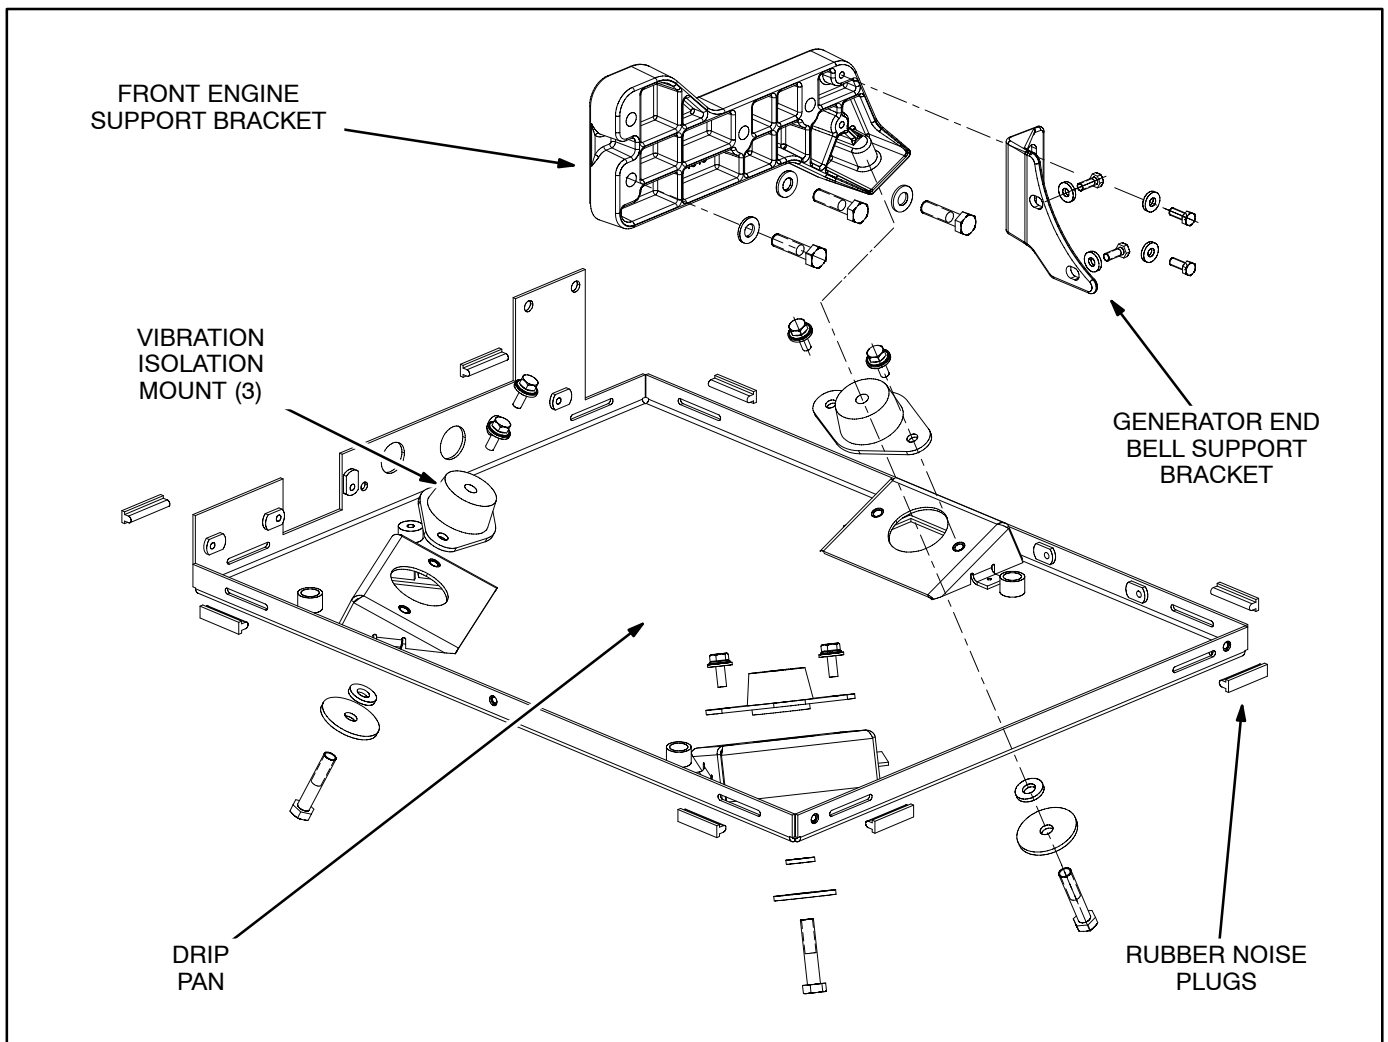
DRIP PAN AND MOUNTING SYSTEM
